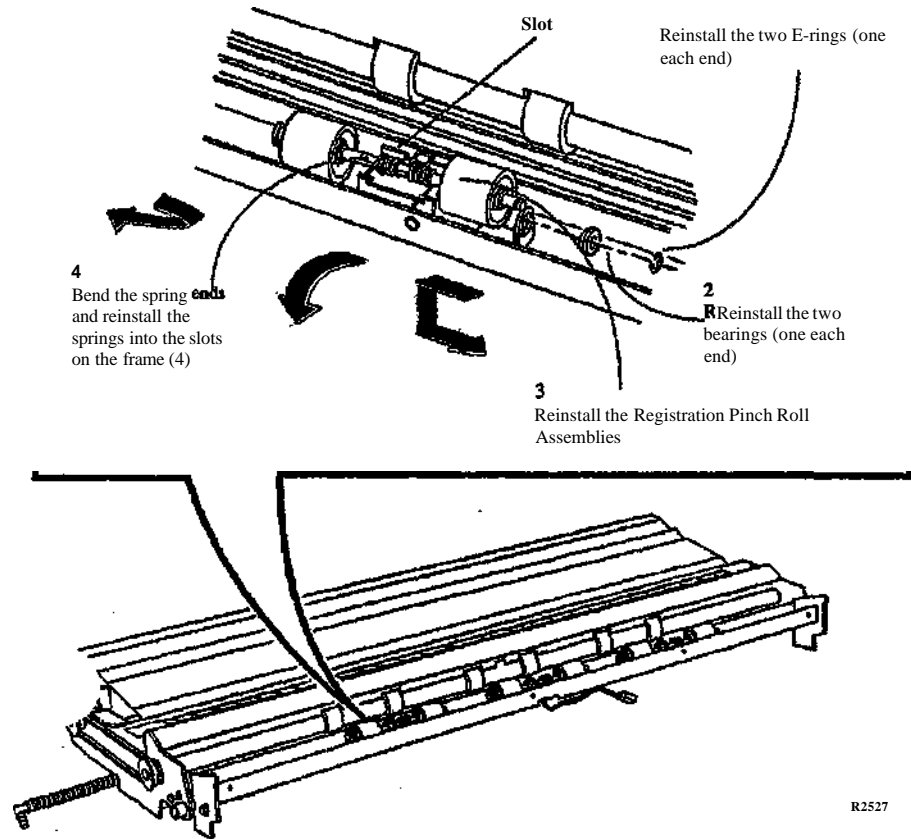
Reinstalling the Registration Pinch Roll Assembly
